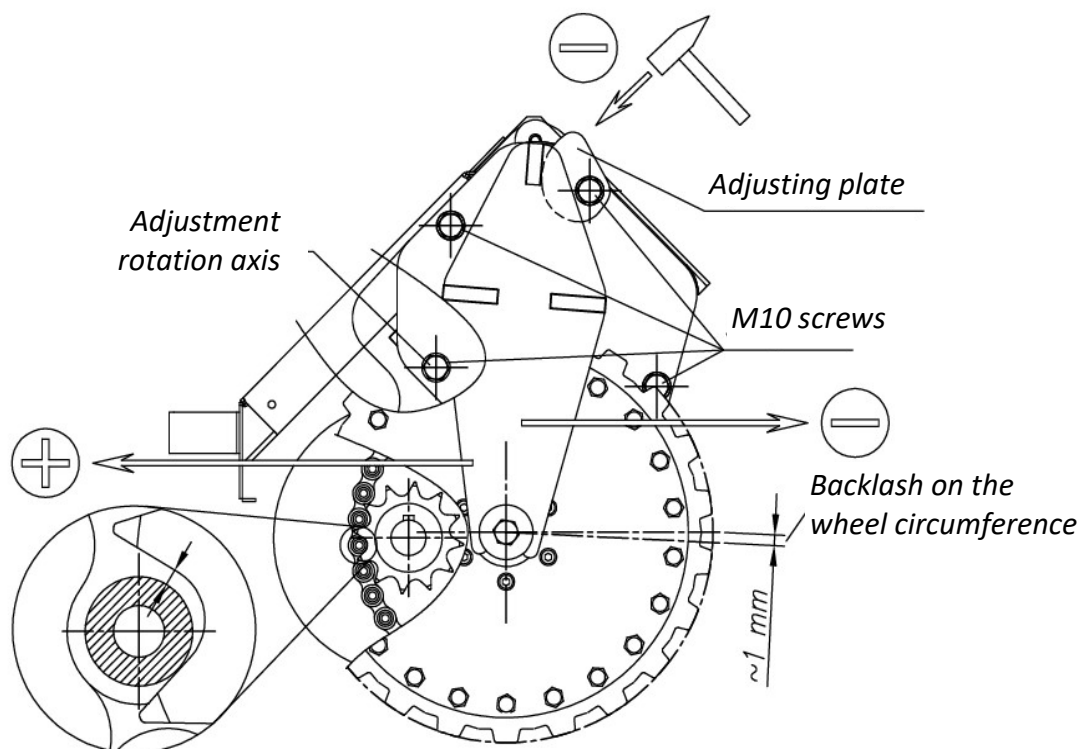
Adjustment of the drive of the running wheel of the PSWEX conveyor
